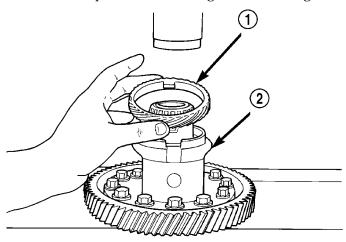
Install Differential Bearing Cone to Ring Gear Side
